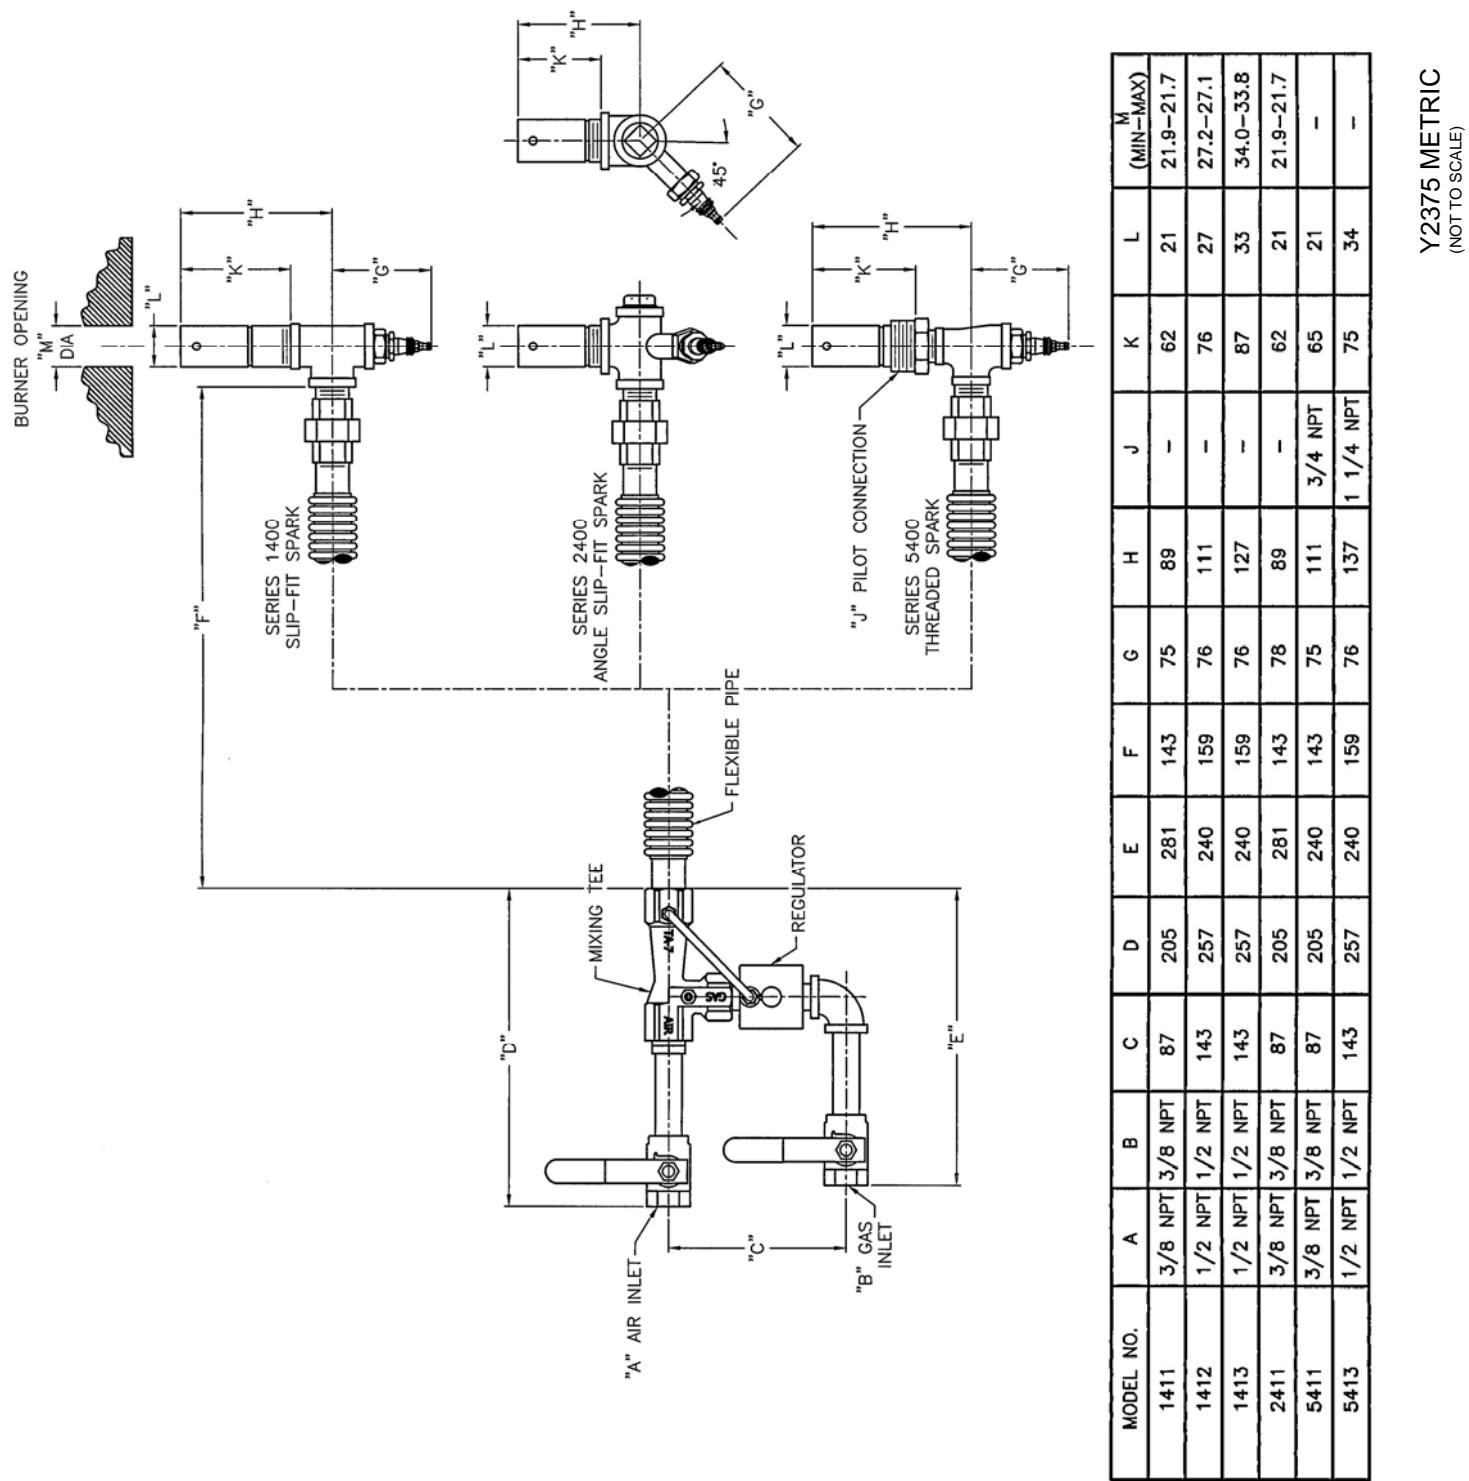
Metric Dimensions Back-Loaded Gas Less Solenoid Valves
